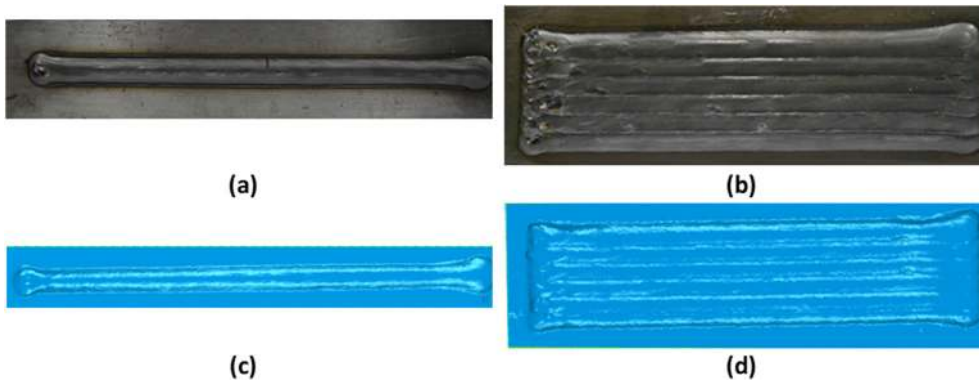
Actual and laser 3D scan weld bead (a and c) and weld layer (b and d).
